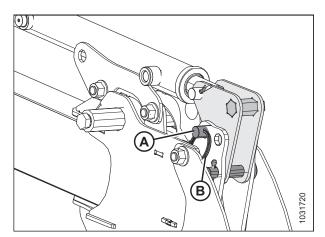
Fore-Aft Cylinder Adjustment Type 1 – Aft Position
